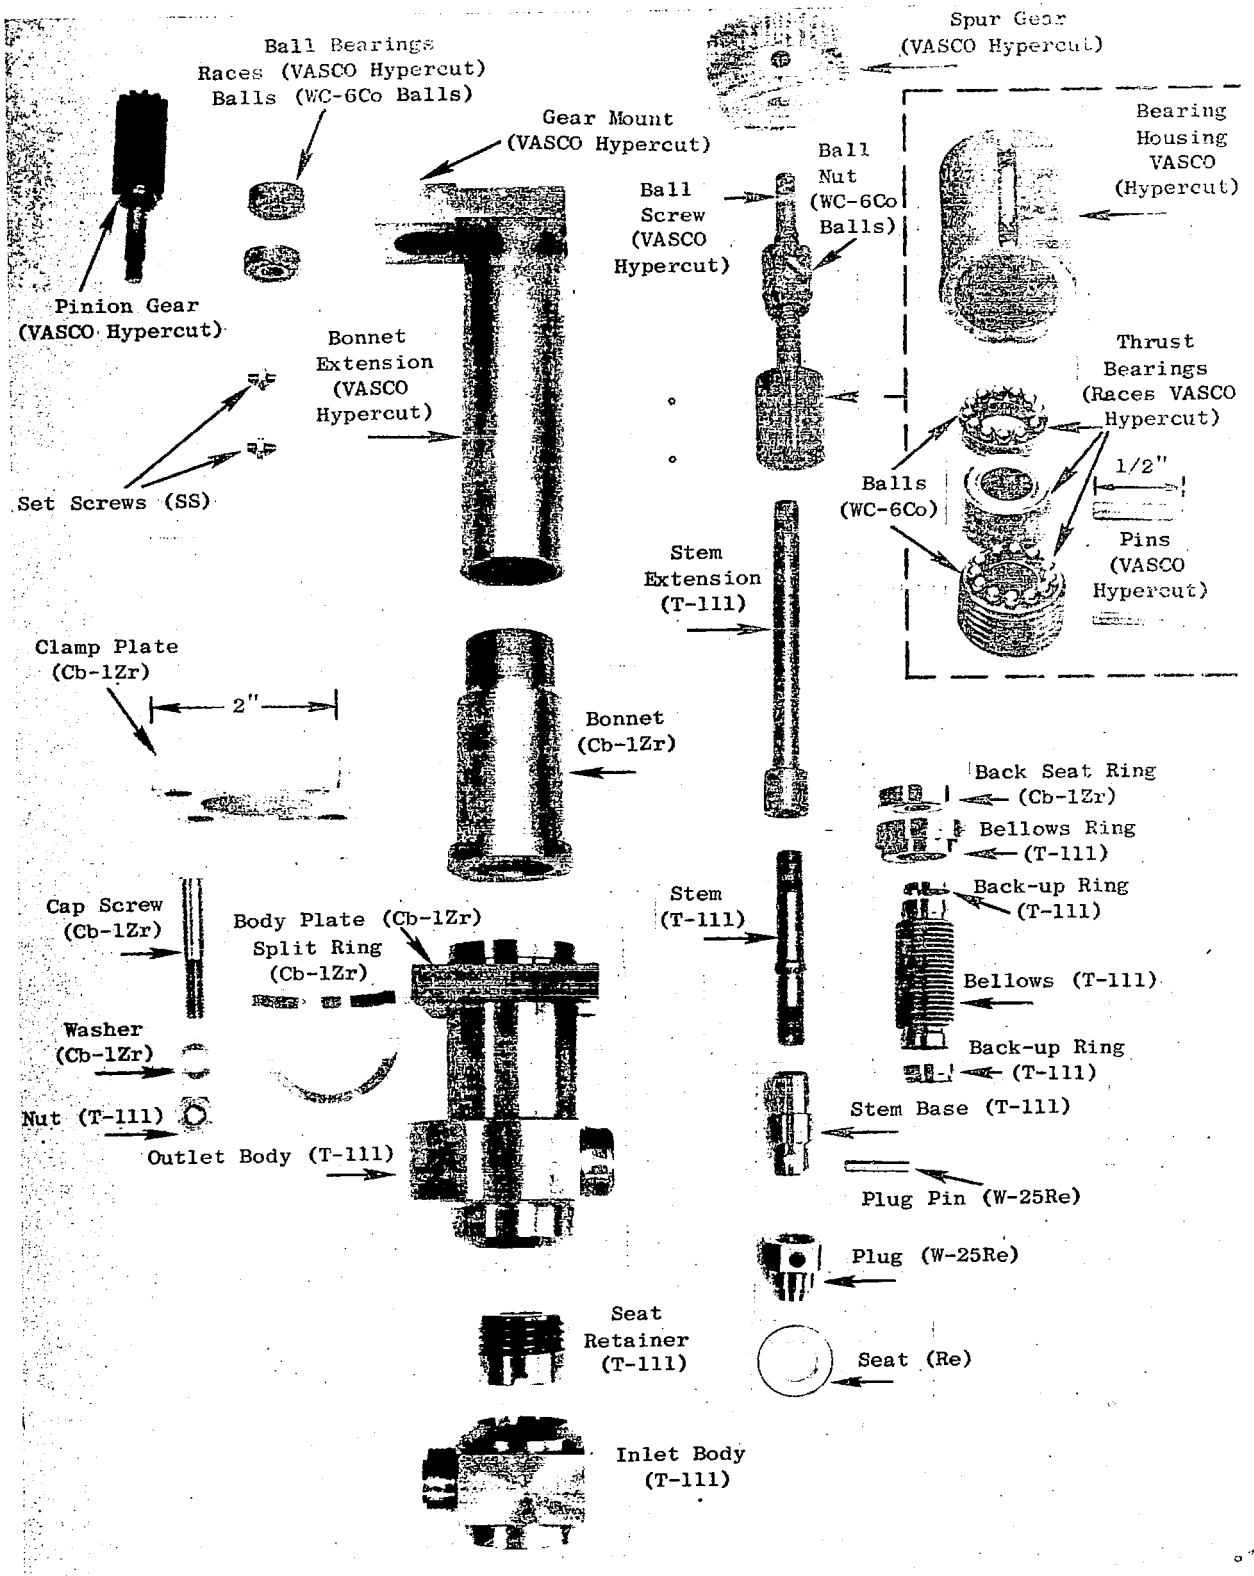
High Temperature Alkali Metal Valve Parts Before Assembly. (P69-8-15)
